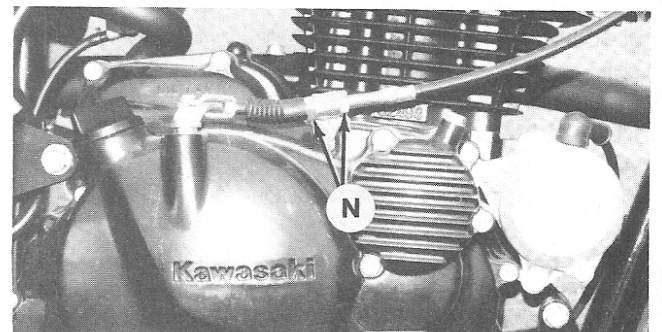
Loosen adjusting nuts (N) on models so equipped, to slacken clutch cable during clutch adjustment.
